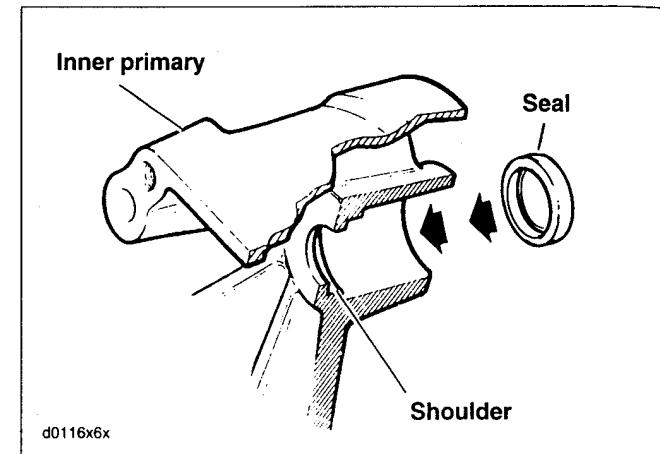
Primary Chaincase Jackshaft Oil Seal
